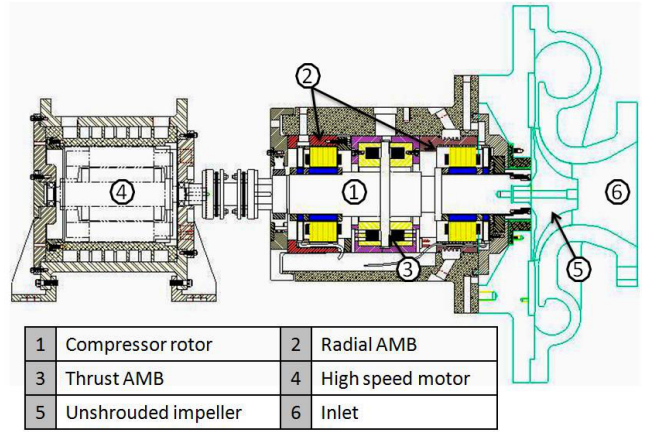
Single state centrifugal compressor with unshrouded impeller and rotor supported on AMBs.
